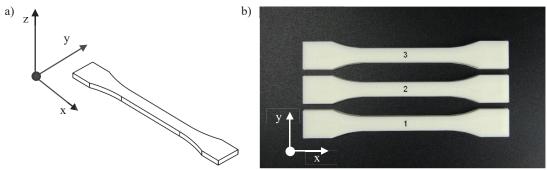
a) Flat orientation on the building platform, b) Positioning of the test specimens in a build job
